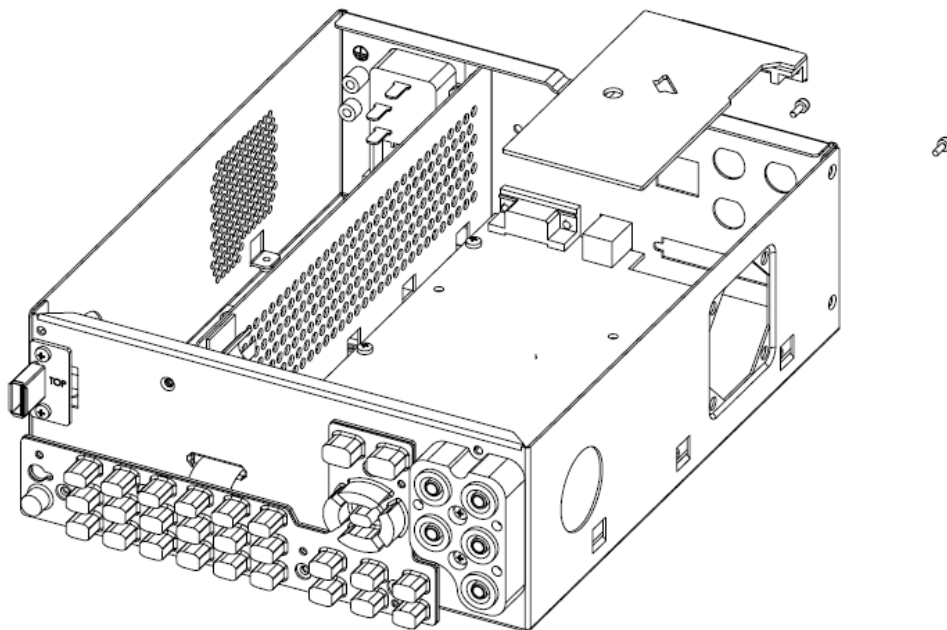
The Schematic of Disassembling and Assembling Multiplexer Board
